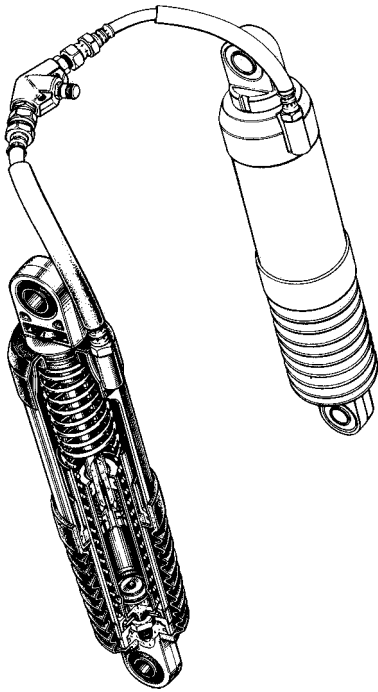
Used on various touring models in the mid 1980s. This Kawasaki design used twin air-adjustable rear shocks on the rear. The internal pressures were equalized by means of the connecting tube, the centre of which held a valve so that pressure could be adjusted to allow for differing loads. Normal coil springs were also fitted to carry some of the load.
